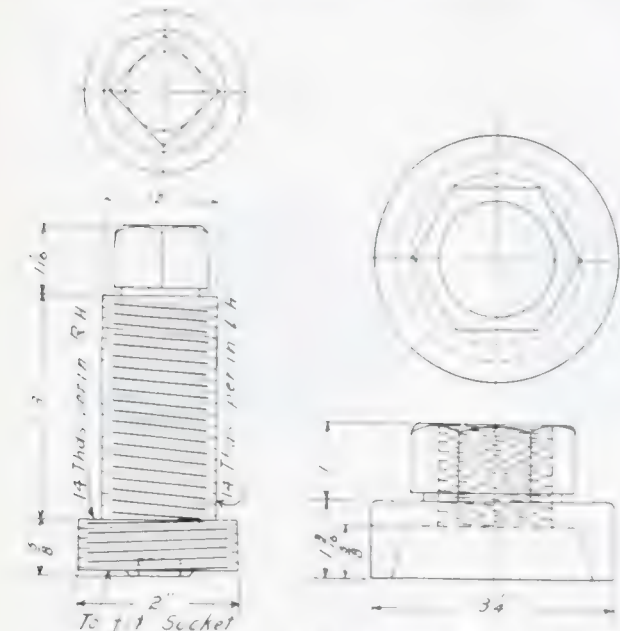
STEEL AND NUT FOR SHELL SOCKET TOOL.
